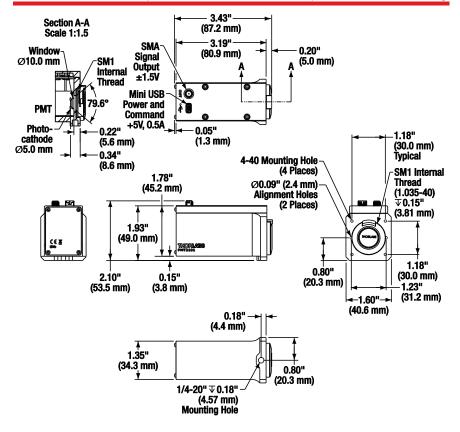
Mechanical Drawing of the PMT2101 Series PMT Housing
